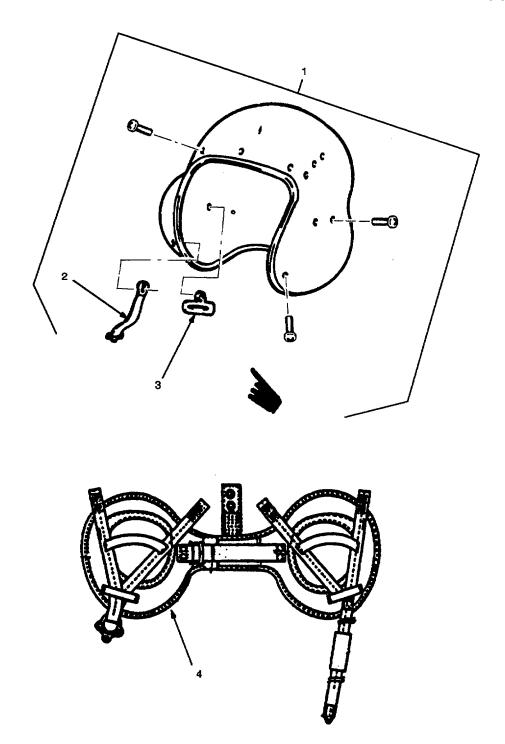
Retention and Suspension Assembly (Sheet 1 of 2).
